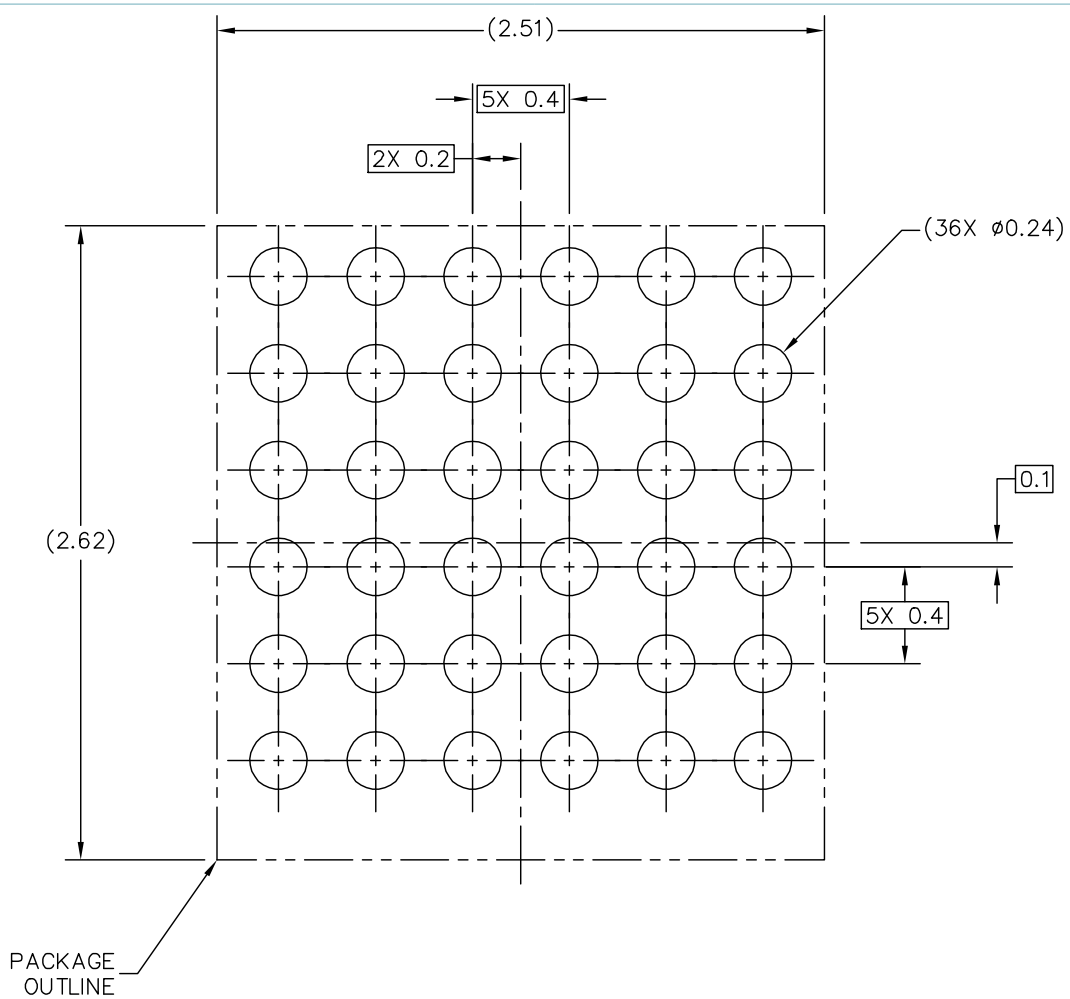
Reflow soldering footprint for WLCSP36 (SOT1780-7)
